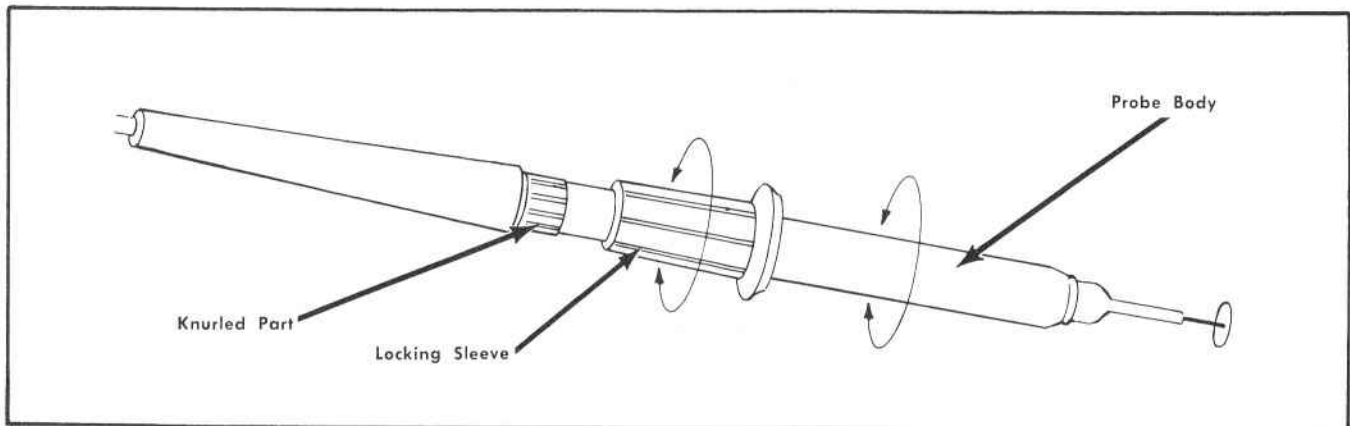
Location of locking sleeve and knurled parts on the P6006 Probe.
